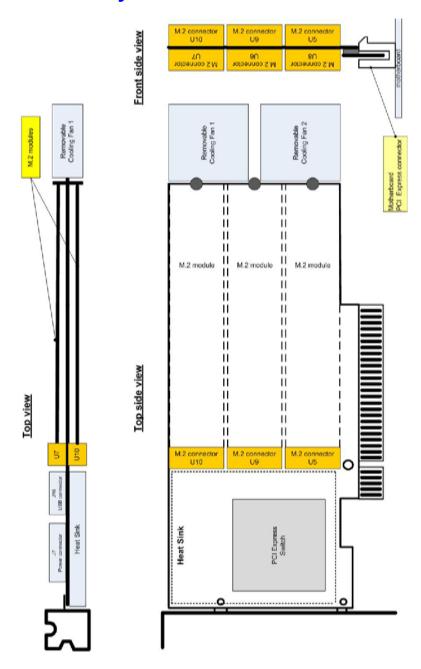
PCIe Gen 3 Carrier Board for six M.2/NGSFF(NF1) modules - layout
